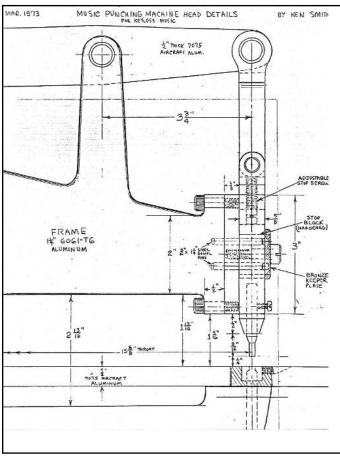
"Music punching machine head details" as detailed in a precise drawing by Ken Smith. Courtesy: Ken Smith Archives
